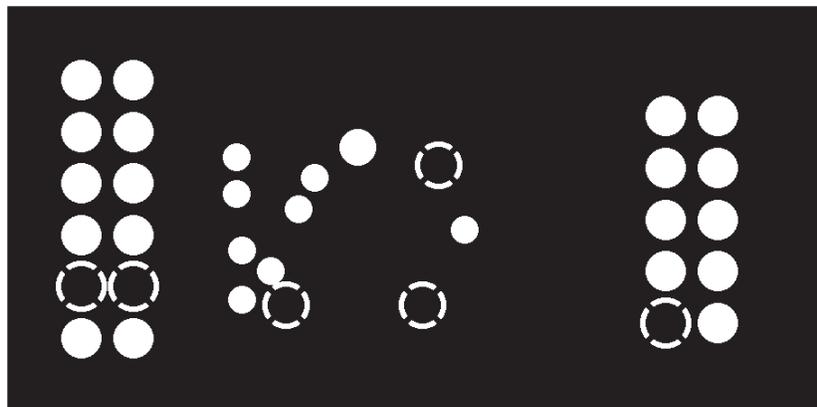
MAX4824PMB1 Peripheral Module PCB Layout—Inner Layer 1 (Ground)
